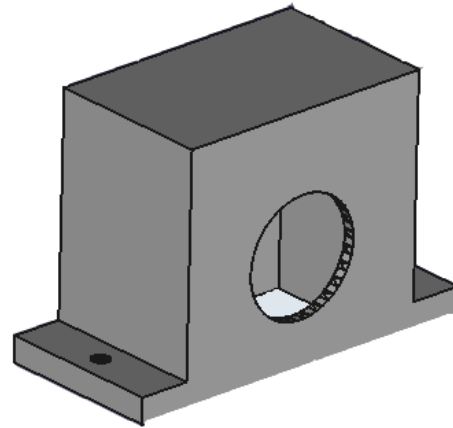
Body of the prototype spirometer. The PCB containing the solenoid is mounted on top of the body. Air flows through the device, and up through the rectangular hole located at the back of the body. A housing is mounted over this hole to allow airflow occlusion by the solenoid.
